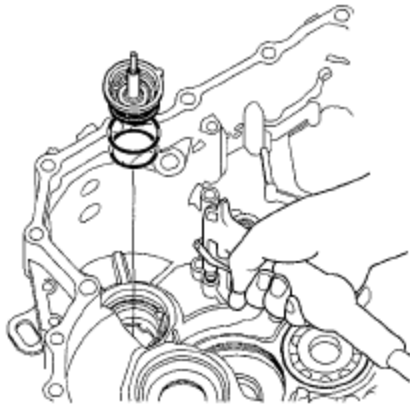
Applying Air Pressure To ATF Feed Pipe Hole Of 1st-Hold Clutch Pressure Circuit
